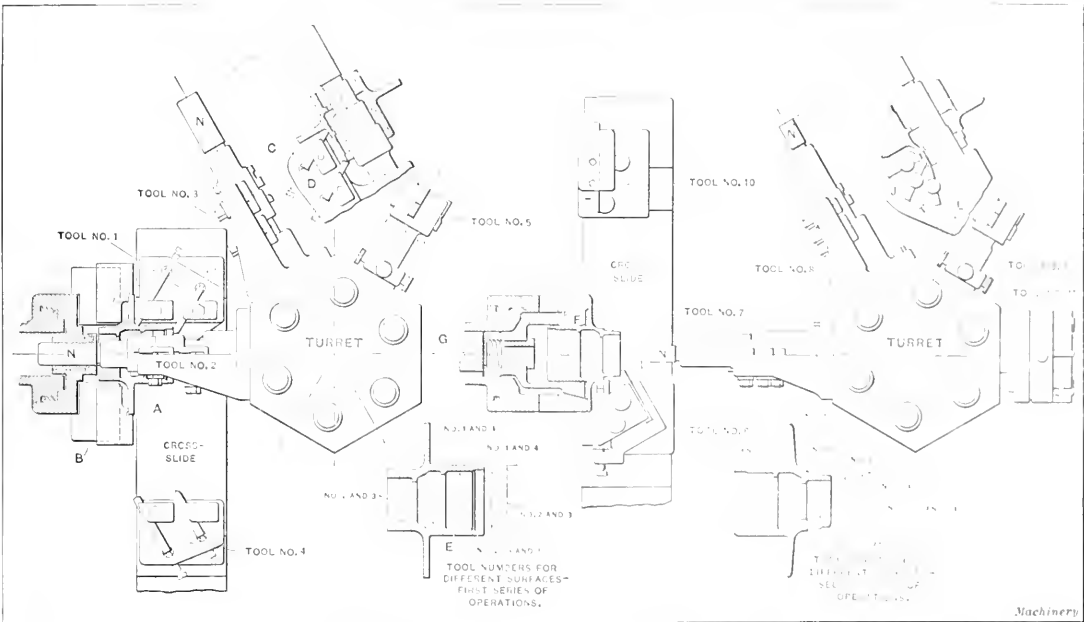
Diagram showing Layout of Tools for performing First Series of Operations on Automobile Wheel Hubs
